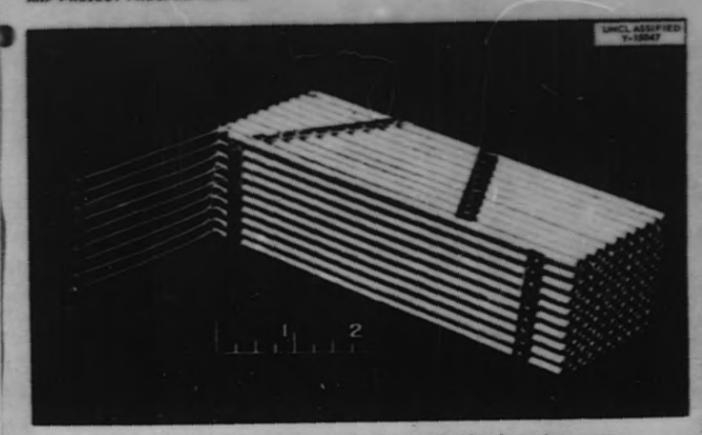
Sample Tube Bundle Shawing Two Types of Comblike Spacer Arrangements.
